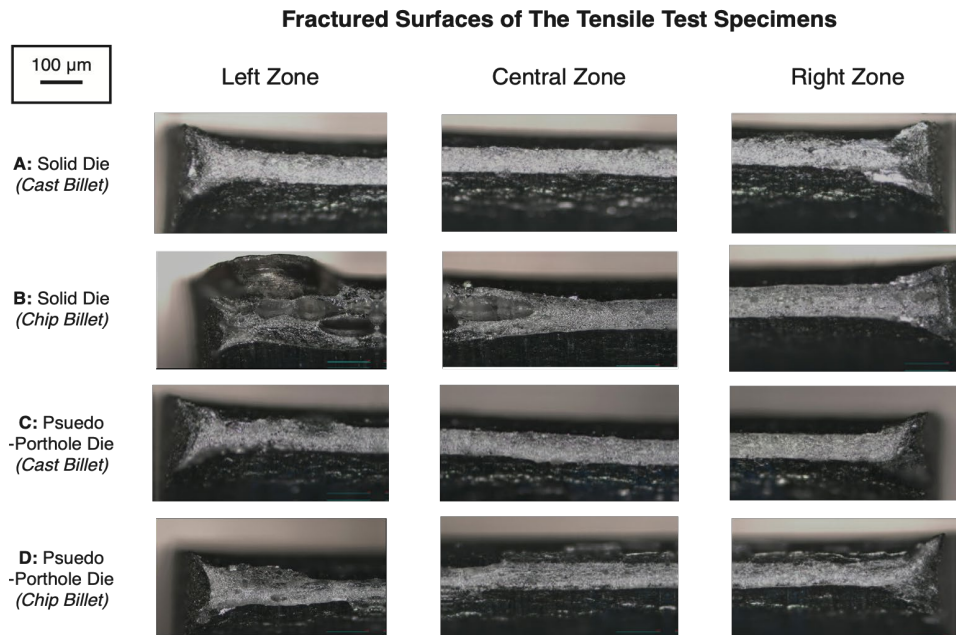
Cross-sections of the tensile test specimens at their fractured locations
